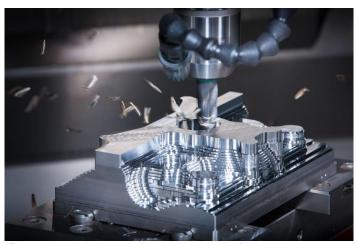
PARTS WITH HIGH DEGREE OF MACHINING (SOURCE: IOT BUSINESS NEWS).
